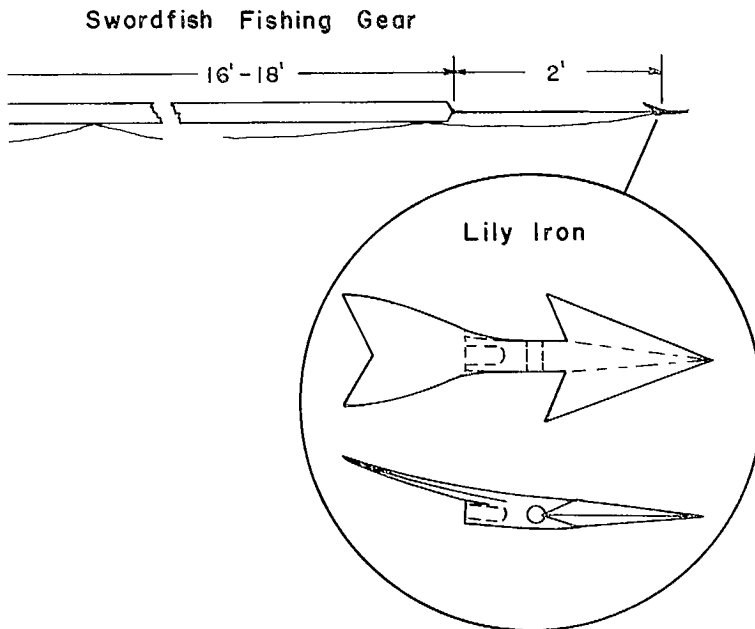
Swordfish fishing gear. Drawing by P. W. G. McMullon.
